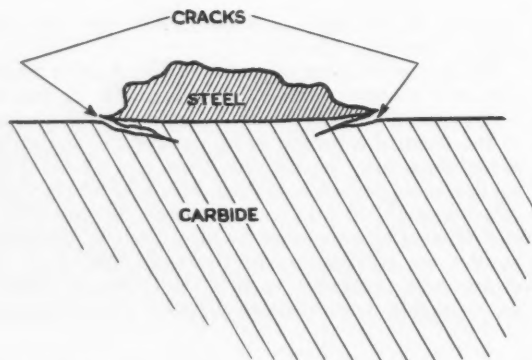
Diagram illustrating formation of cracks due to difference in coefficient of expansion between carbide tool and steel built-up edge.
